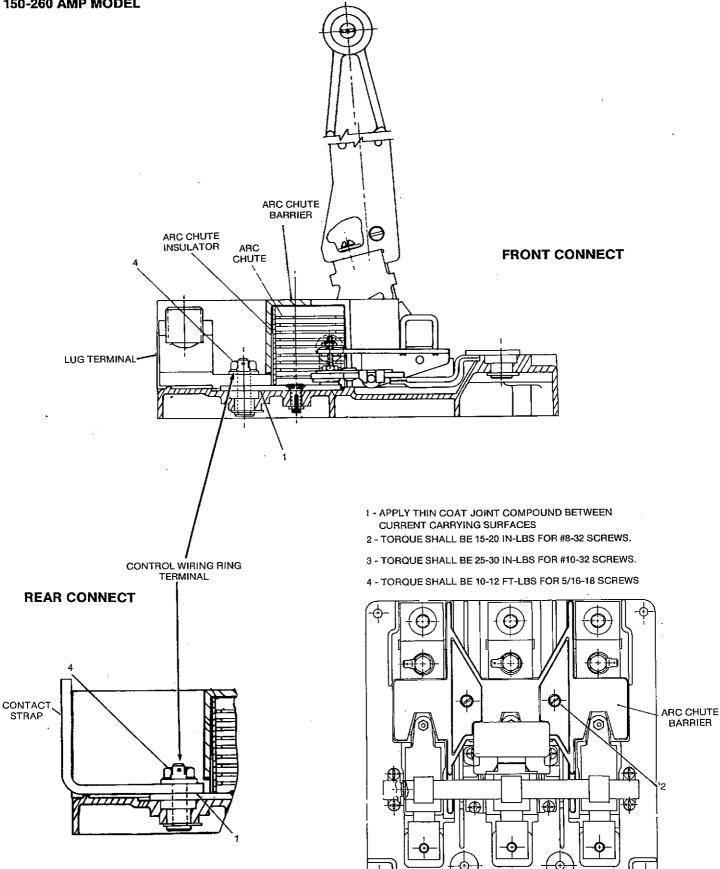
FRONT AND REAR CONNECT SWITCH ASSEMBLY
